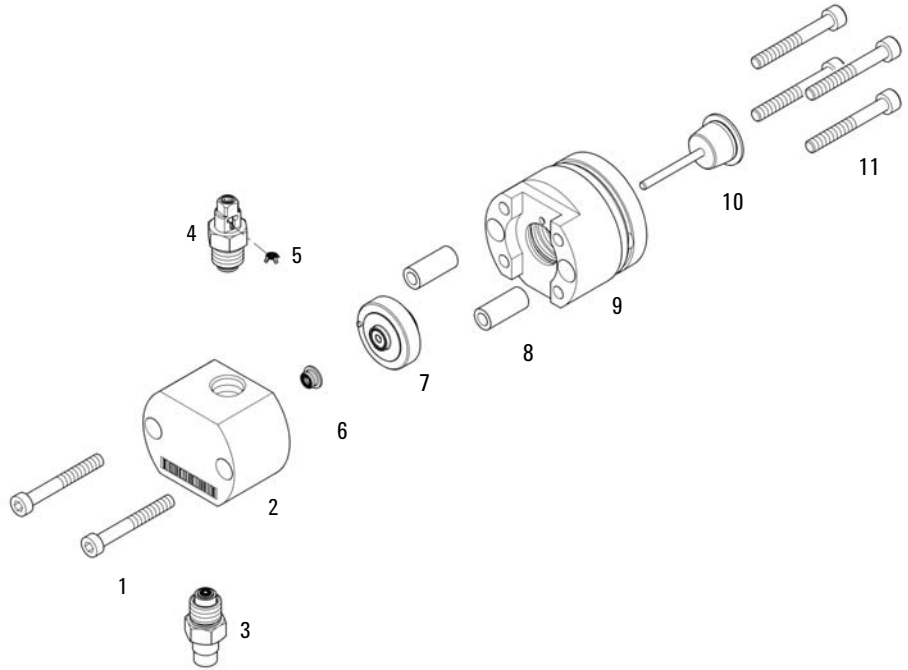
Primary pump head (Quaternary Pump) without seal wash
